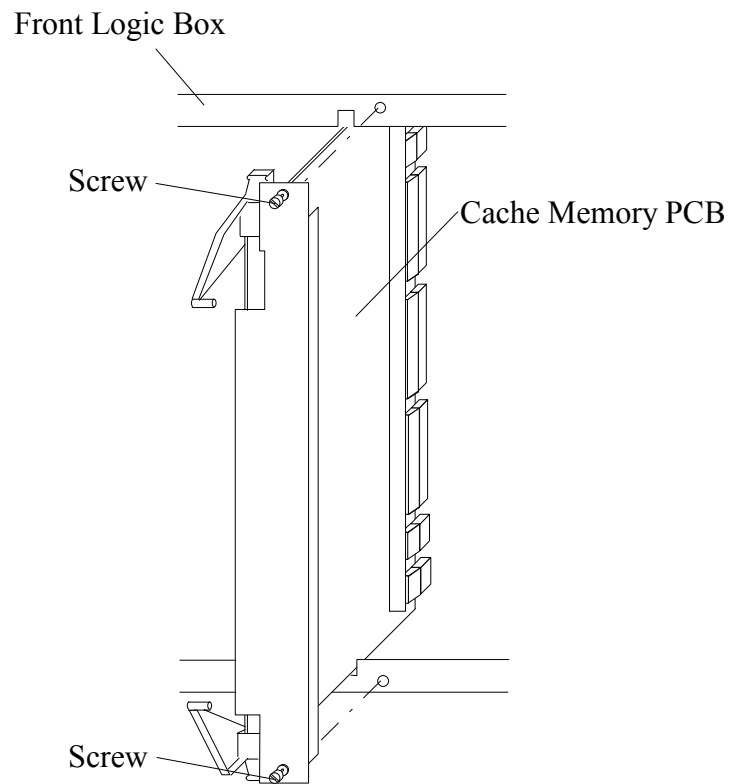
Removal of the Cache Memory PCB
